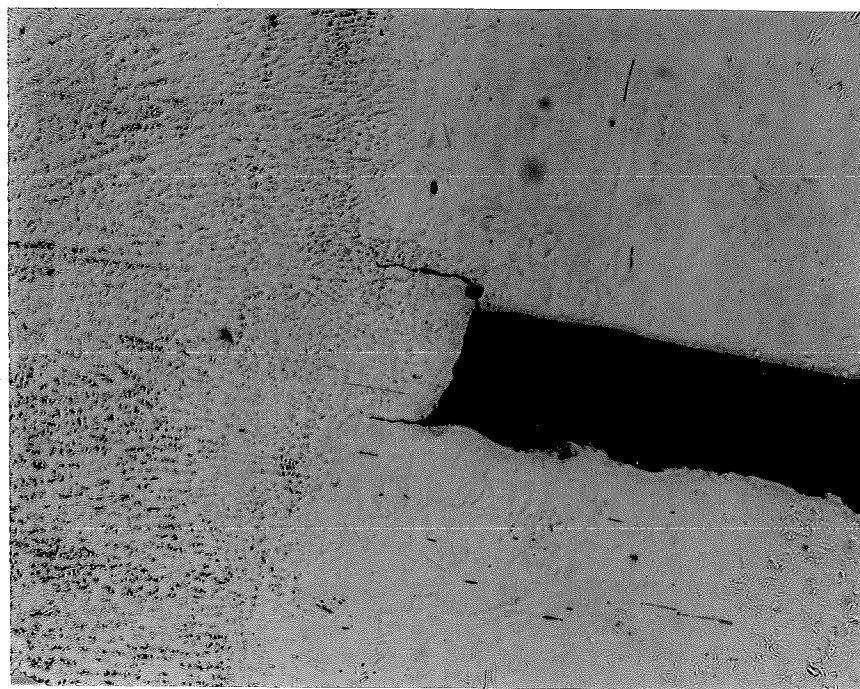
Root Crack Tip Untested Specimen With Large Plate Gap - 133X
